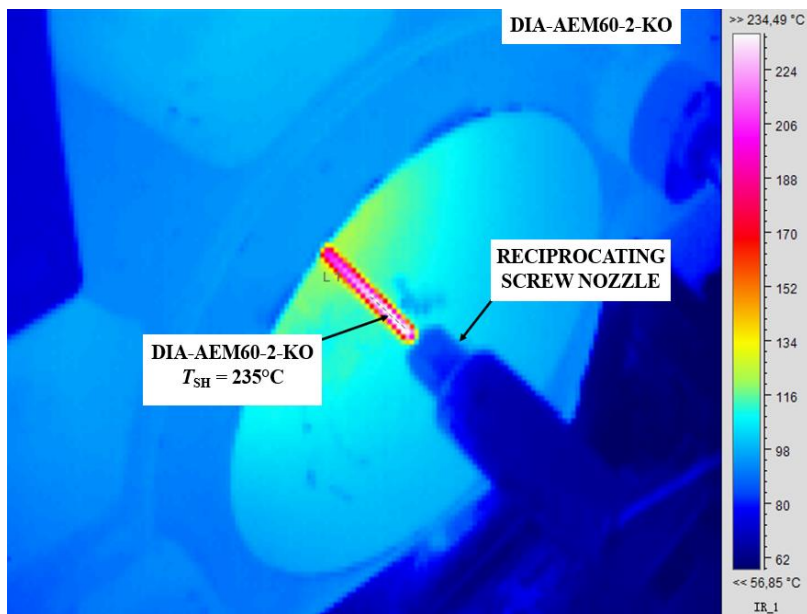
Image of DIA-AEM60-2-KO emerging from the reciprocating screw nozzle outlet [27].
